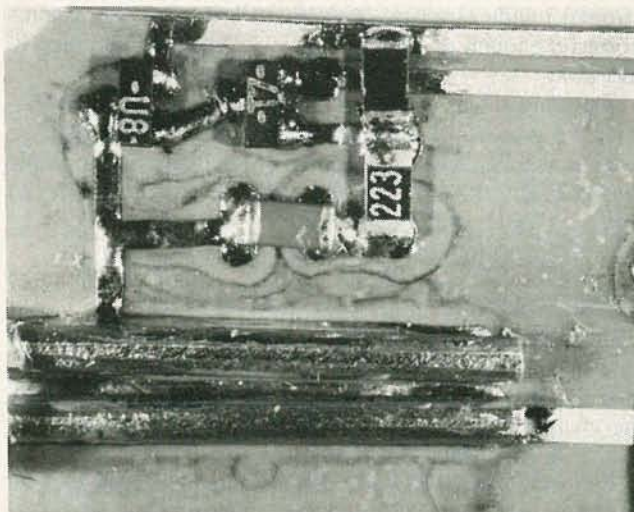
THIS CLOSE-UP SHOWS how really small the components are. The transistor, labeled U8, is actually smaller than the resistor and capacitor chips. The two "giant" horizontal tubes near the bottom are the LED socket.
